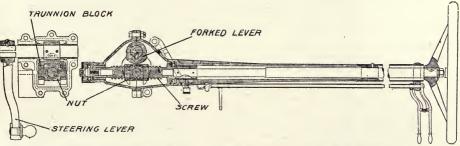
Steering Gear of the Pierce-Arrow 5-Ton Truck.
